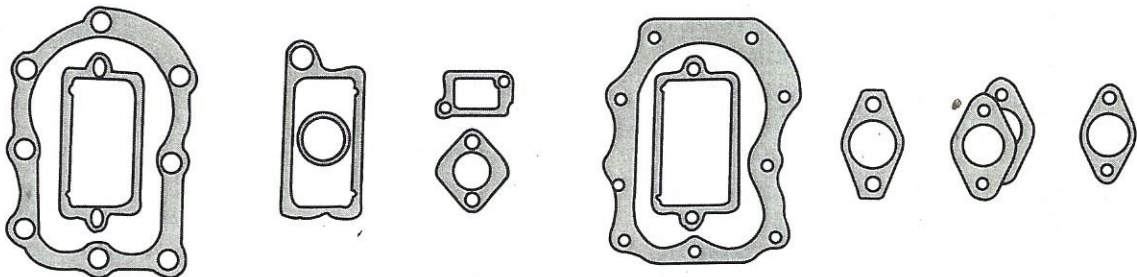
Engine gaskets vary in size, shape, and material. Some gaskets are delicate and should be handled carefully.
